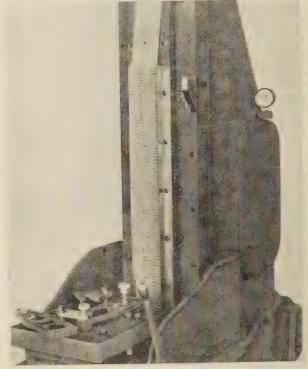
Tooling for Broaching the Teeth in a Cast-Iron Segment
